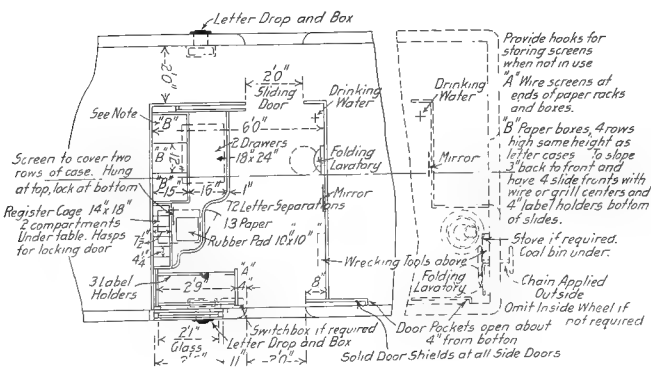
Floor Plan of 6 ft. Alley Apartment.
